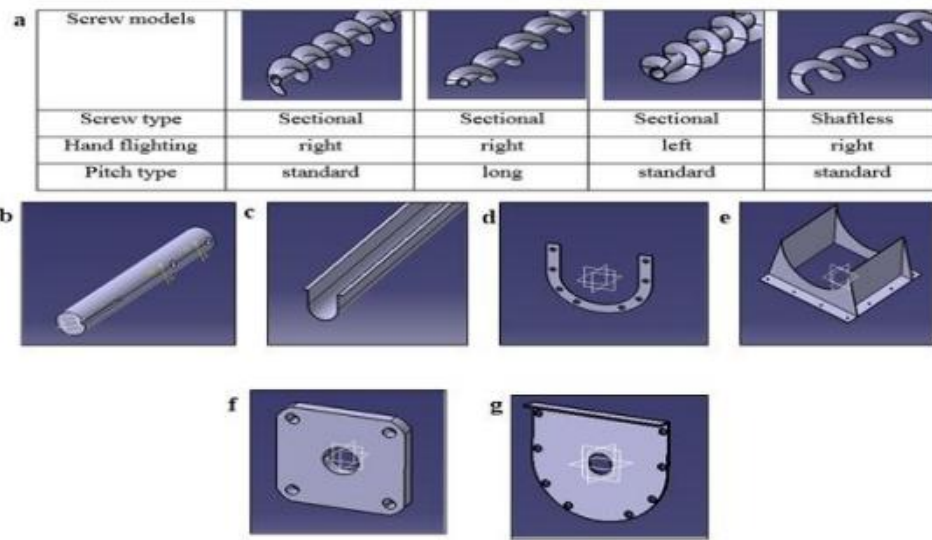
Screw conveyor components a) Screw. b) 2-Bolt Drive Shaft. c) U-Trough. d) U-Trough End Flange e) Standard Discharge. f) Plate Seal. g) U-Trough Style End Plate
